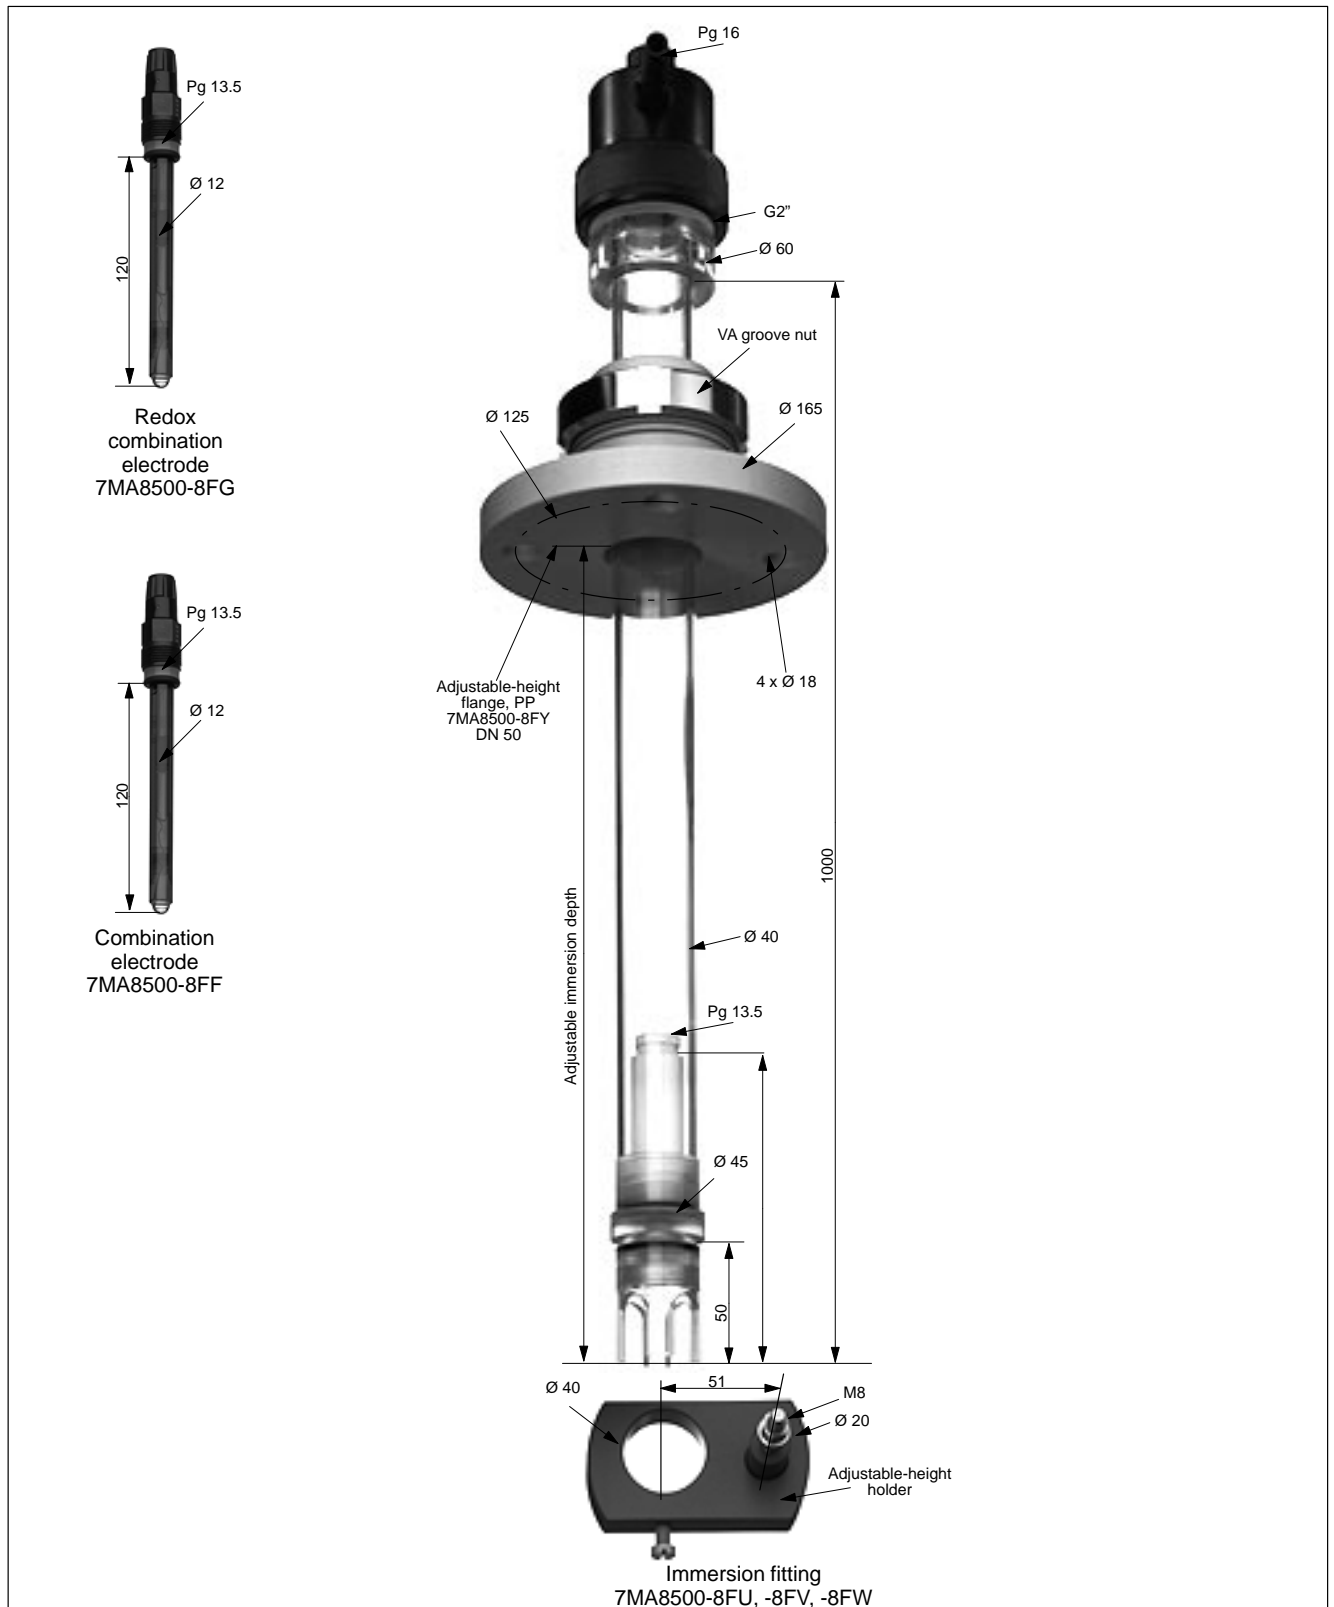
/27 Sensors for pH and ORP measurements in tanks or open vessels, dimensions in mm
